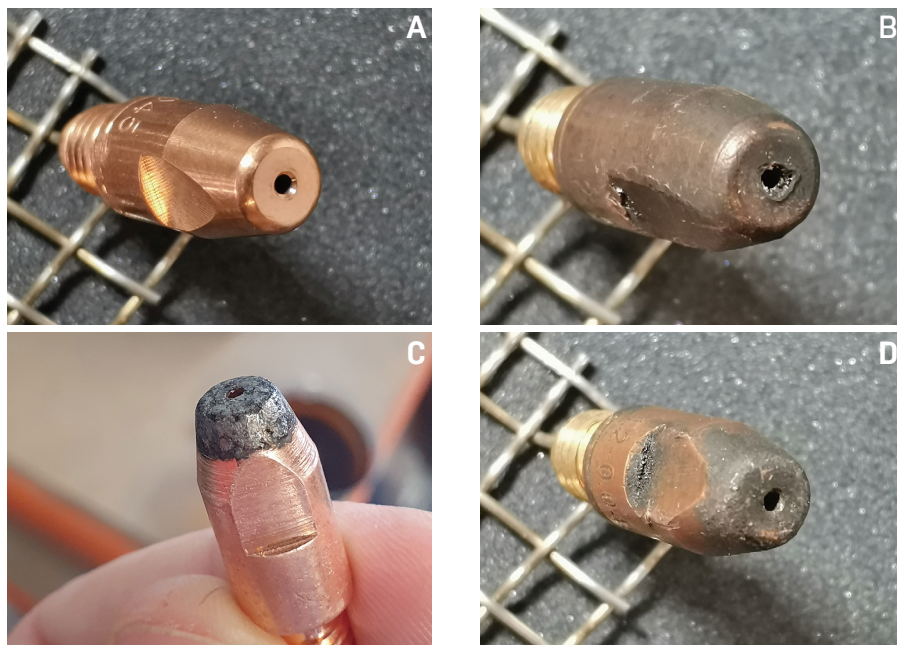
A — Uncoated contact tip; B — worn uncoated contact tip; C — coated contact tip; D — worn coated contact tip. (Courtesy of SAKA LPG Tank, Konya, Turkey.)
